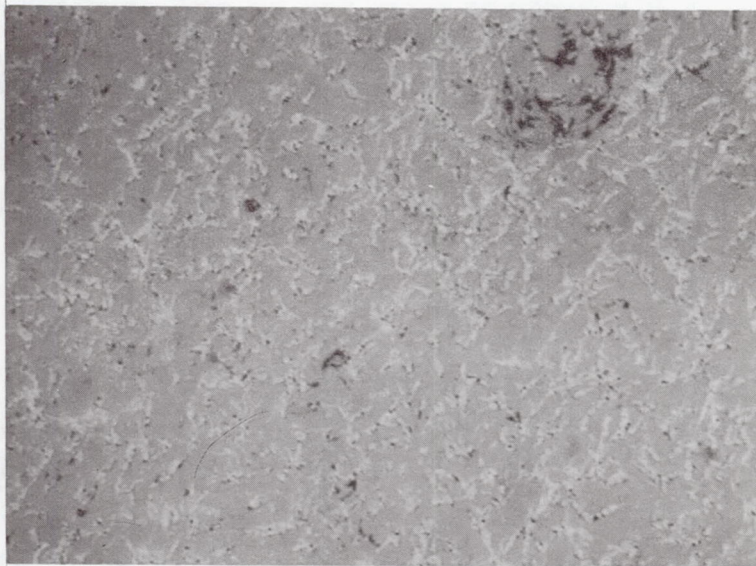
Surface defects on extruded Be-38Al alloy tubing after etching.
